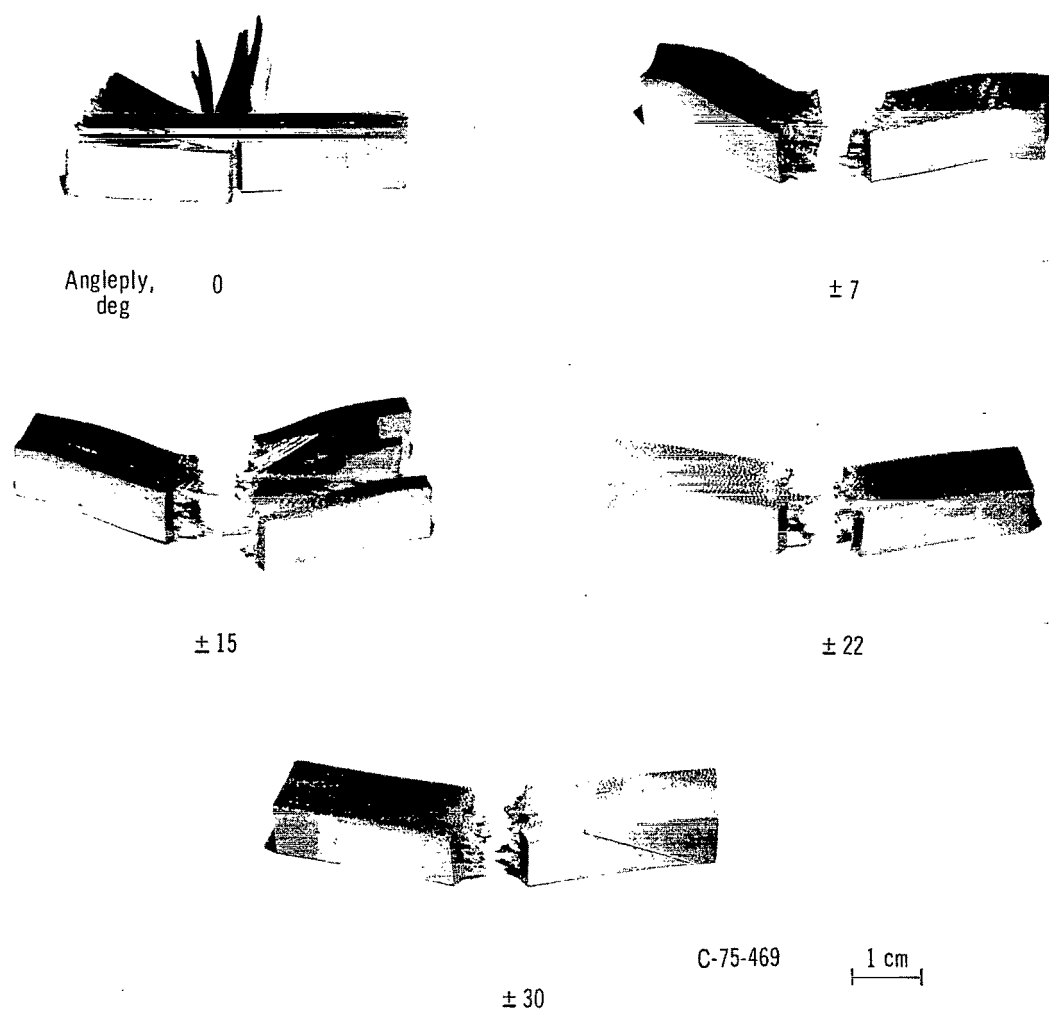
Failed 8-mil-diameter-B/1100 Al full-size Charpy impact test specimens.
